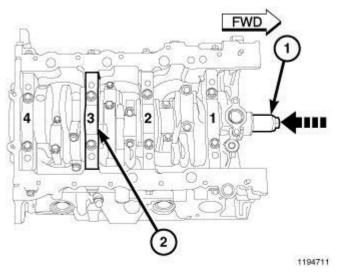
Moving Crankshaft Rearward So Crankshaft Face Is Tight Against Thrust Bearing Courtesy of CHRYSLER LLC
